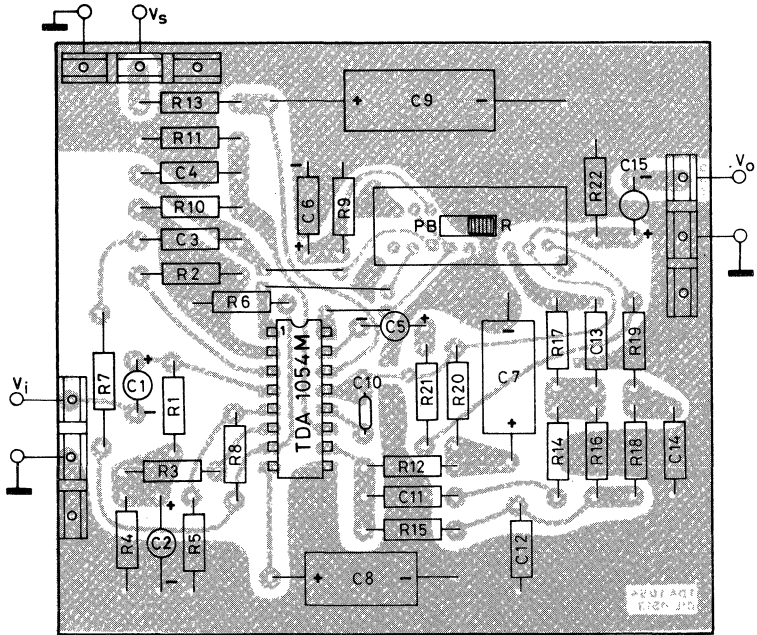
P.C. board and component layout for the circuit fig. 9 (1:1 scale)
